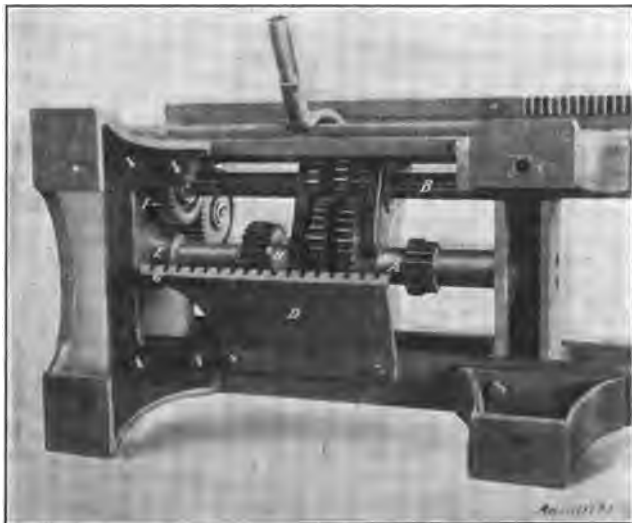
Quick-change Gear Mechanism of Lathe shown in Fig. 1
